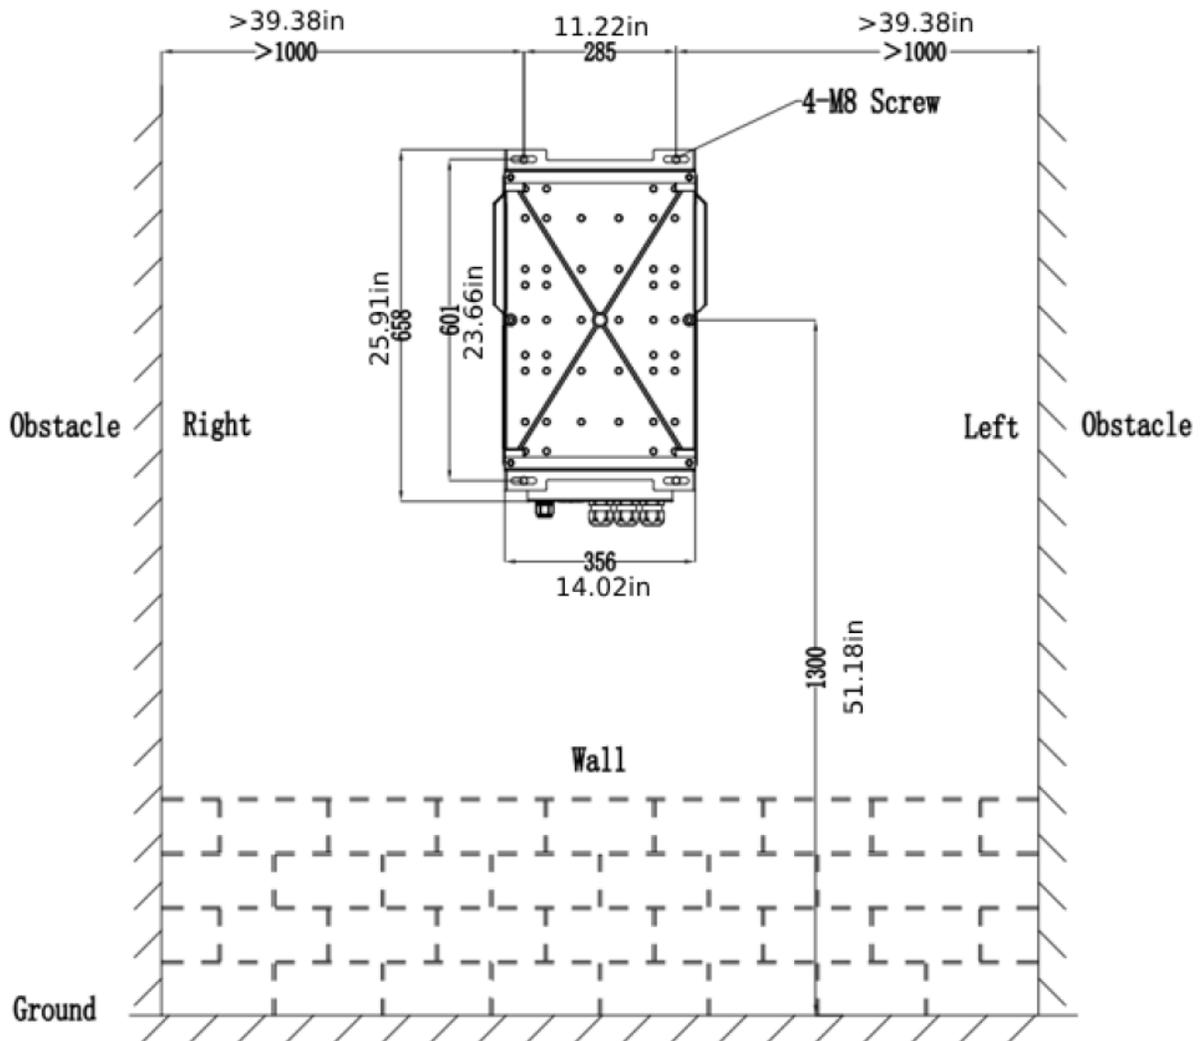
V2X Off Grid Box Back Hole Dimensions
